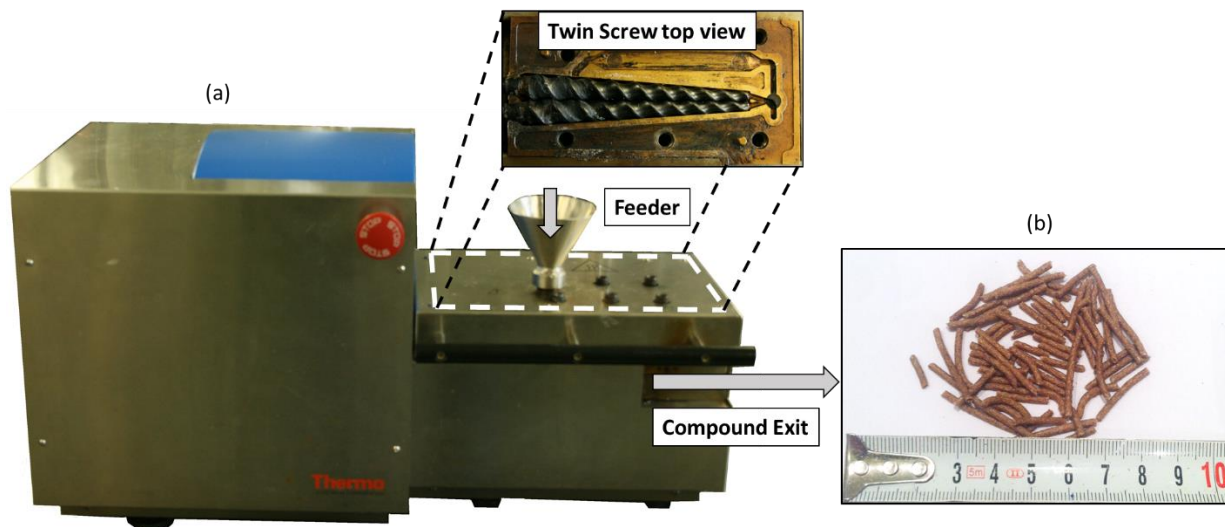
(a) Twin Screw Extruder (b) Extruded Compound
